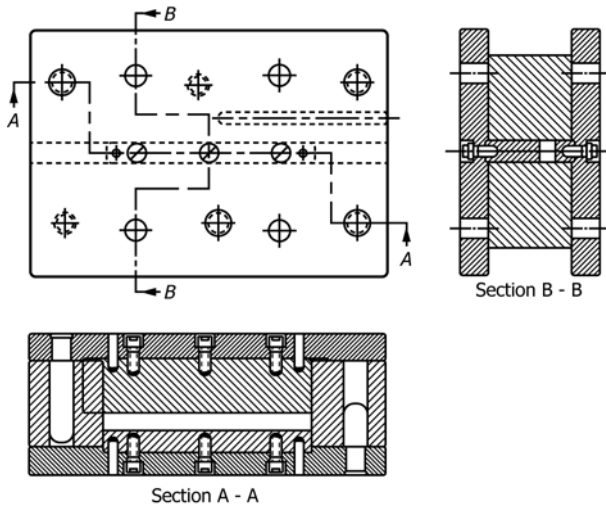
Single-Cavity Positive-Compression Mold for Bar Test Specimens
